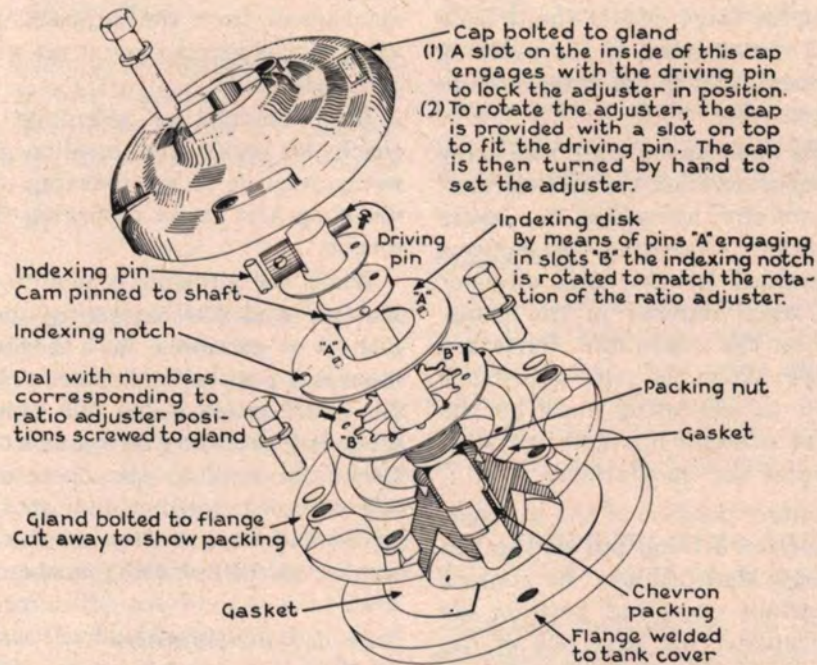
Details of Operating Mechanism for Wedge-type Adjuster
